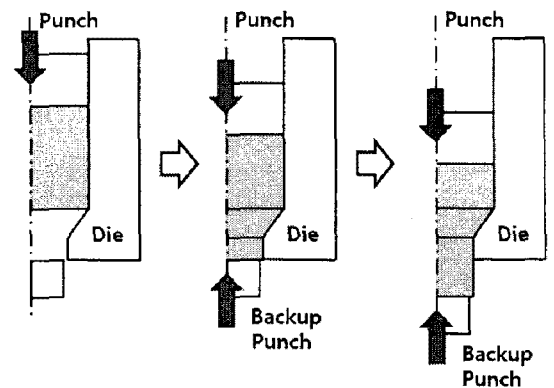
The schematic diagram of helical gear extrusion with backup punch
